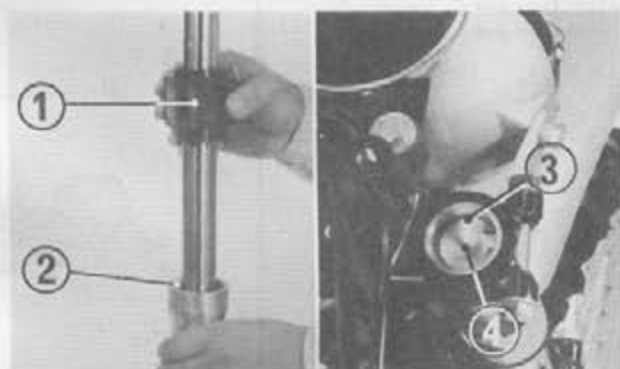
(1) Fork seal driver (2) Oil seal (3) Snap ring (4) Spring upper seat
